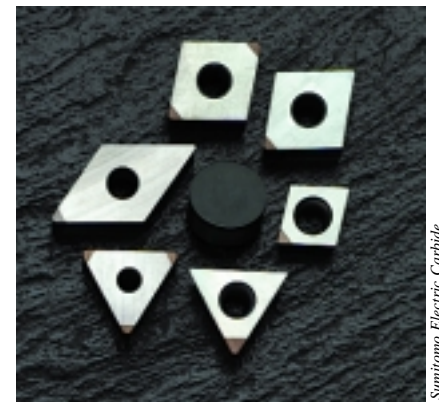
A variety of PCBN tools are available, including carbide inserts with large or small PCBN tips, solid-PCBN inserts and carbide-backed, full-face inserts.
